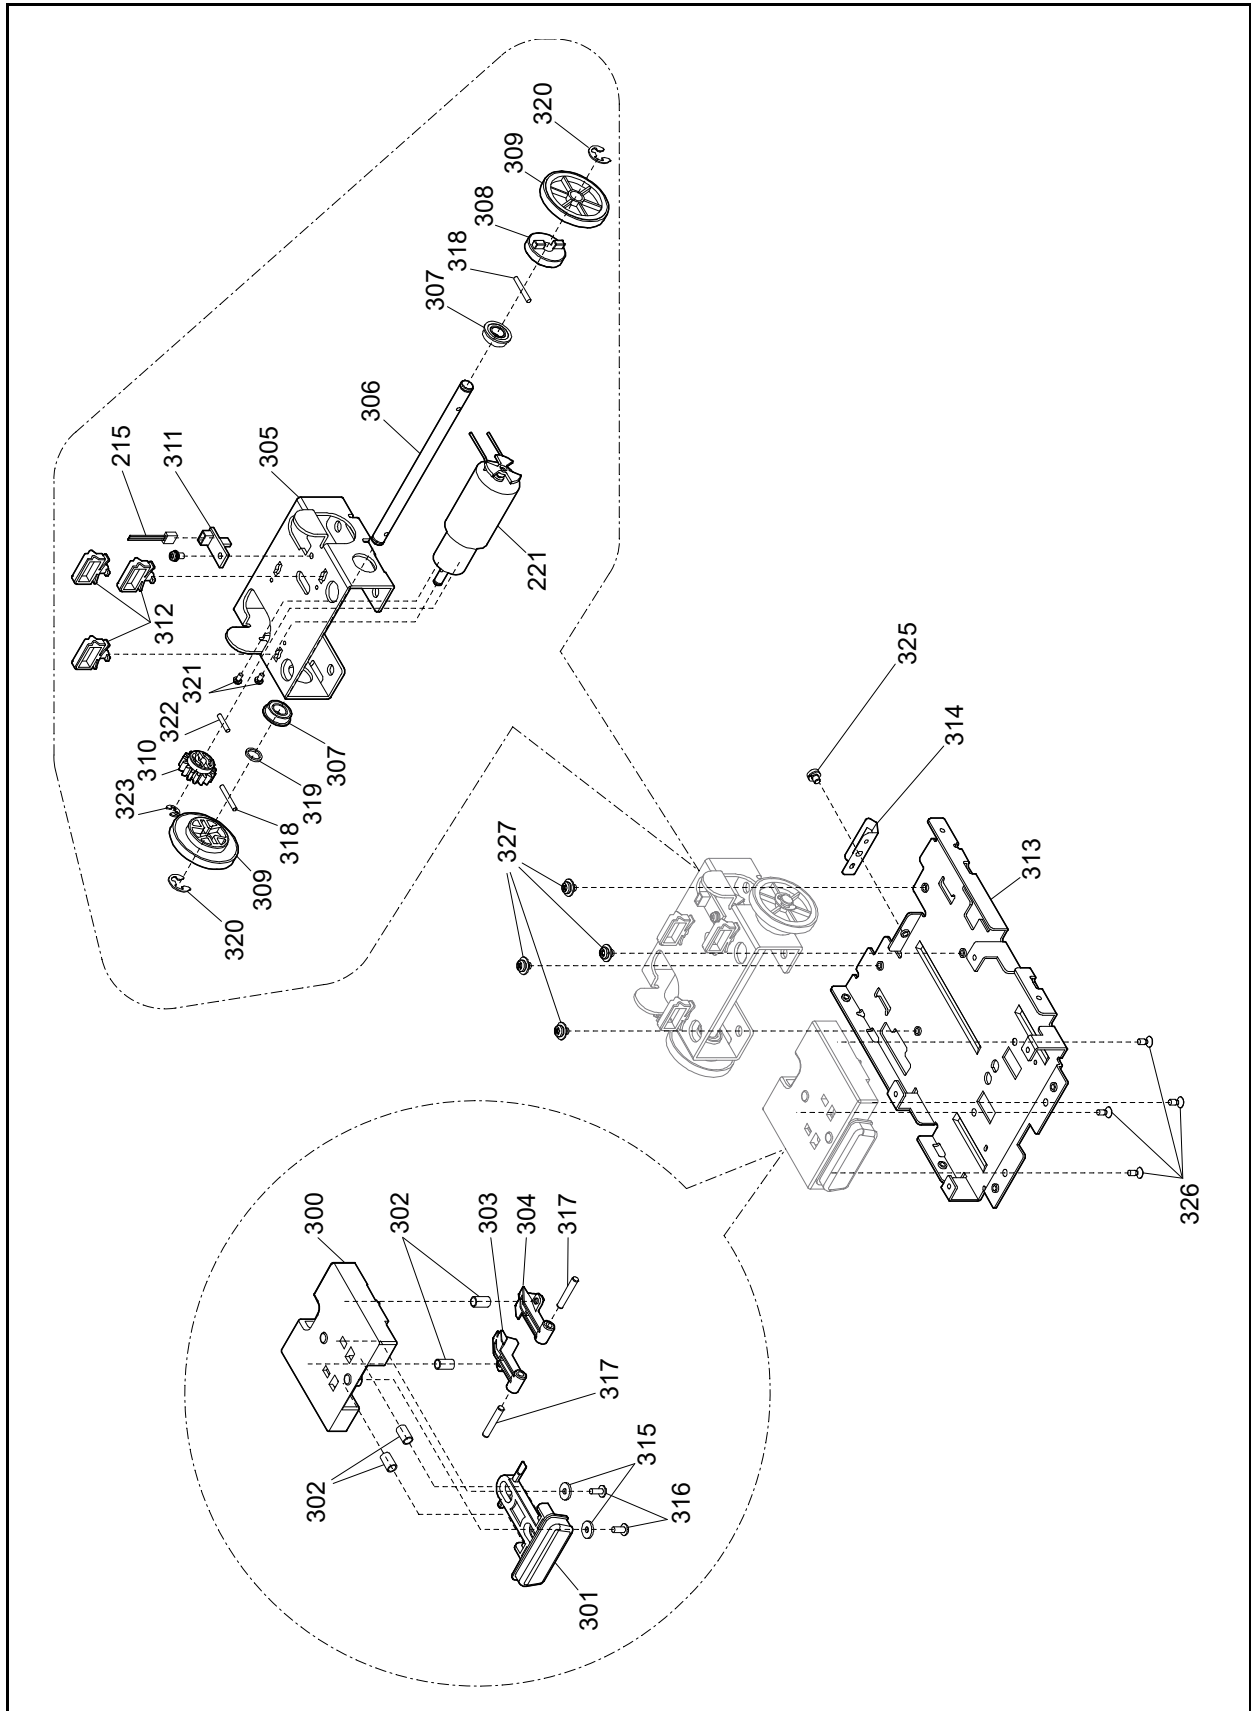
iPRO-RC Frame Unit 3 Exploded View
